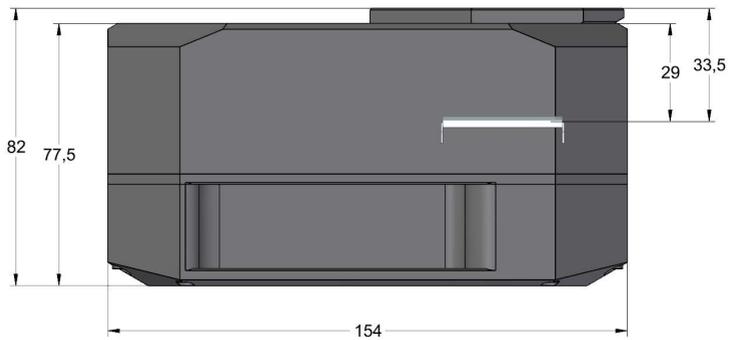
G3 camera head with Internal Filter Wheel side view dimensions
